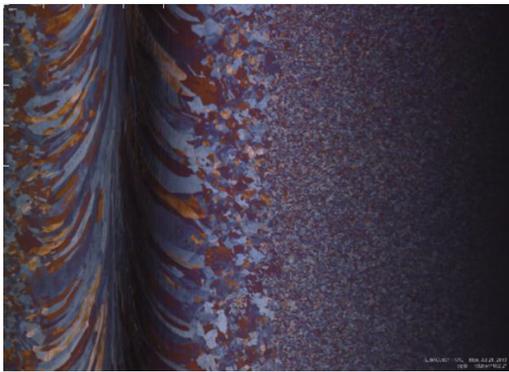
Internal optical inspection of the weld area on a 1.3 GHz XMP copper cavity after cleaning but without chemistry. Image size approximately 1.5 cm×1.5 cm.
